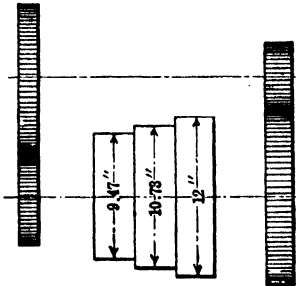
Lathe headstock with plain back gears, counter-shaft speeds 221 and 109 r.p.m., back gear ratio 4.11 to 1.
